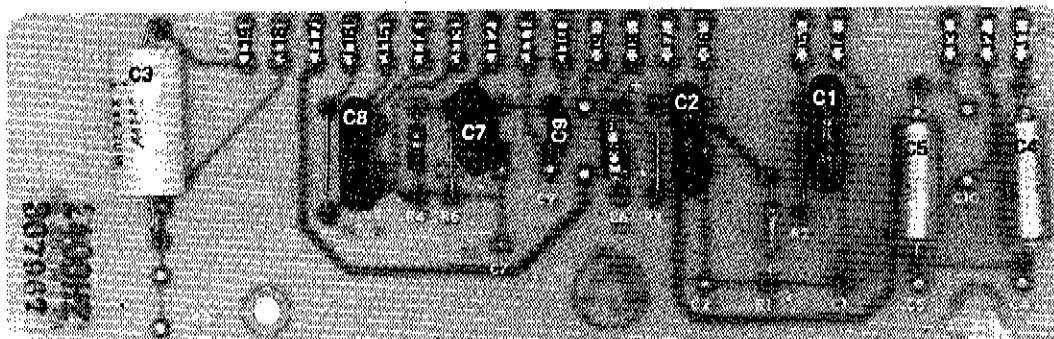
PCB ASSEMBLY 2400 Hz (-06 Option)
